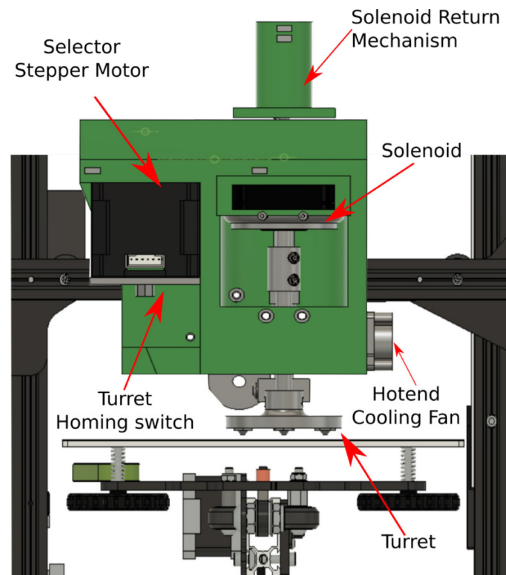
VOE print head mounted on a Creality Ender 3 desktop FFF 3D printer.
